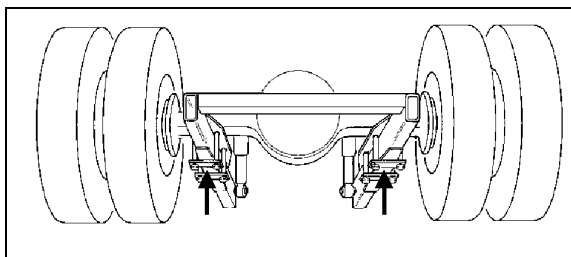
JACKING POINTS ON DRIVE AXLE
